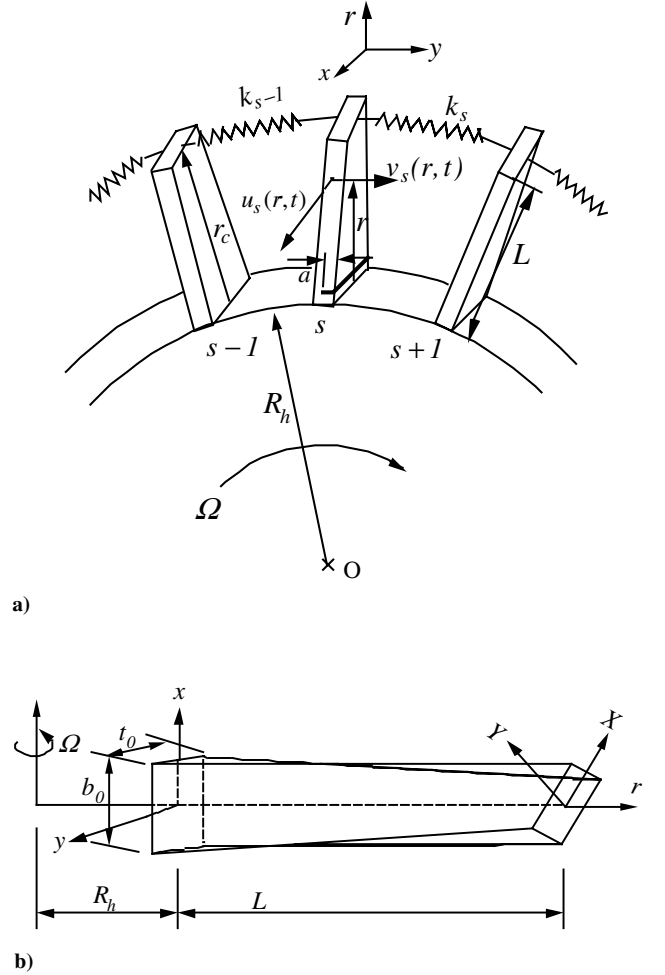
Geometry of cyclically arranged bladed disk assembly: a) geometry of bladed disk assembly, and b) geometry of pretwisted taper blade.
